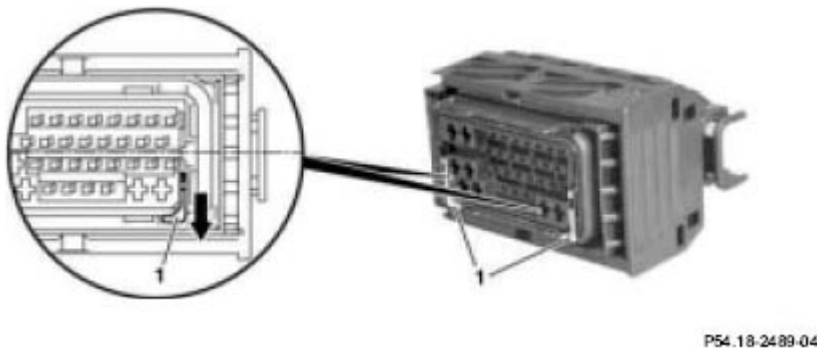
Moving Both Sliding Plates In Housing - Shown On 38-Pin JPT, MQS Coupling
